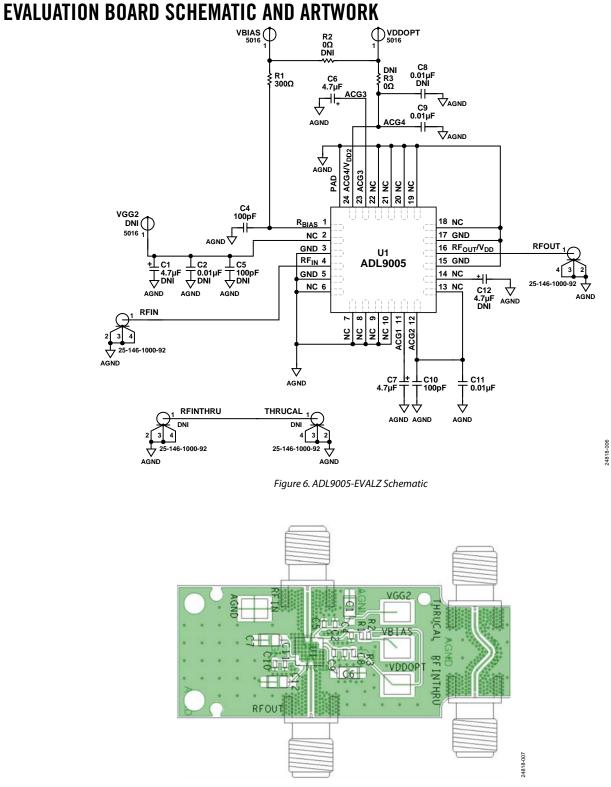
ADL9005-EVALZ Assembly Drawing (RFINTHRU and THRUCAL Not Installed)
